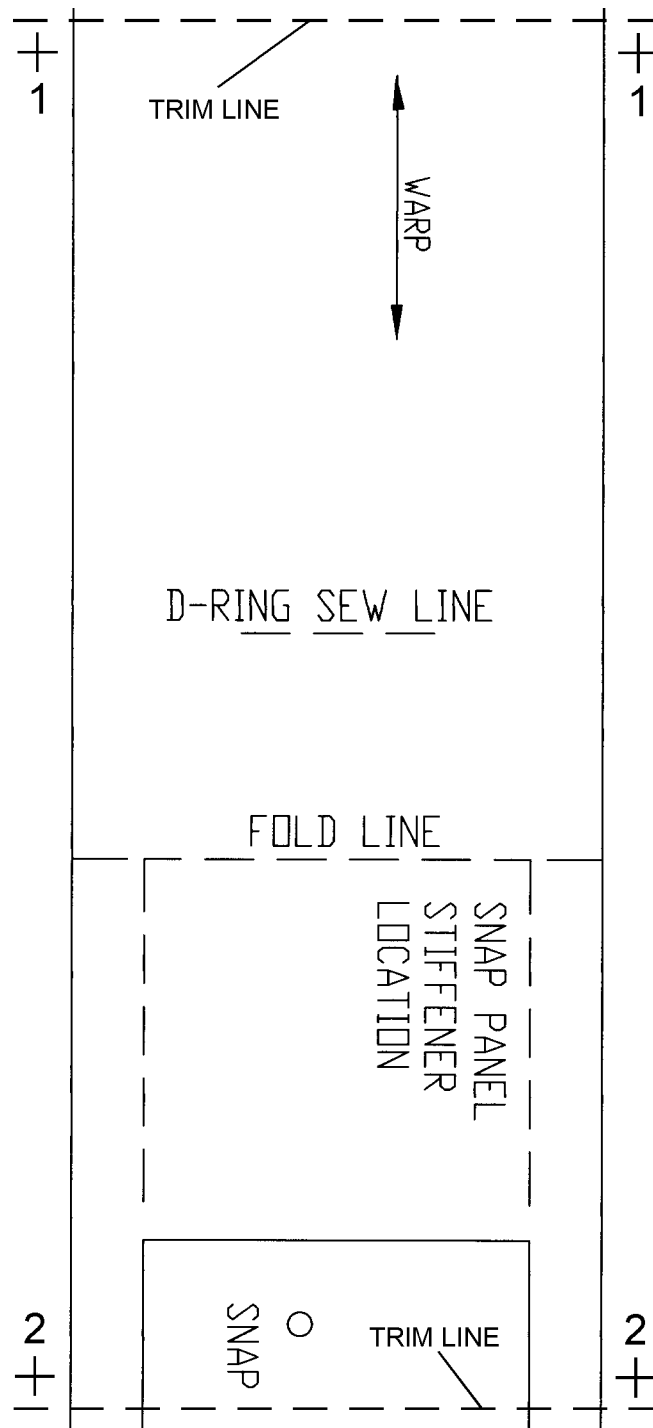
AF. HEED Pocket Support Panel Pattern (Sheet 2 of 4)
